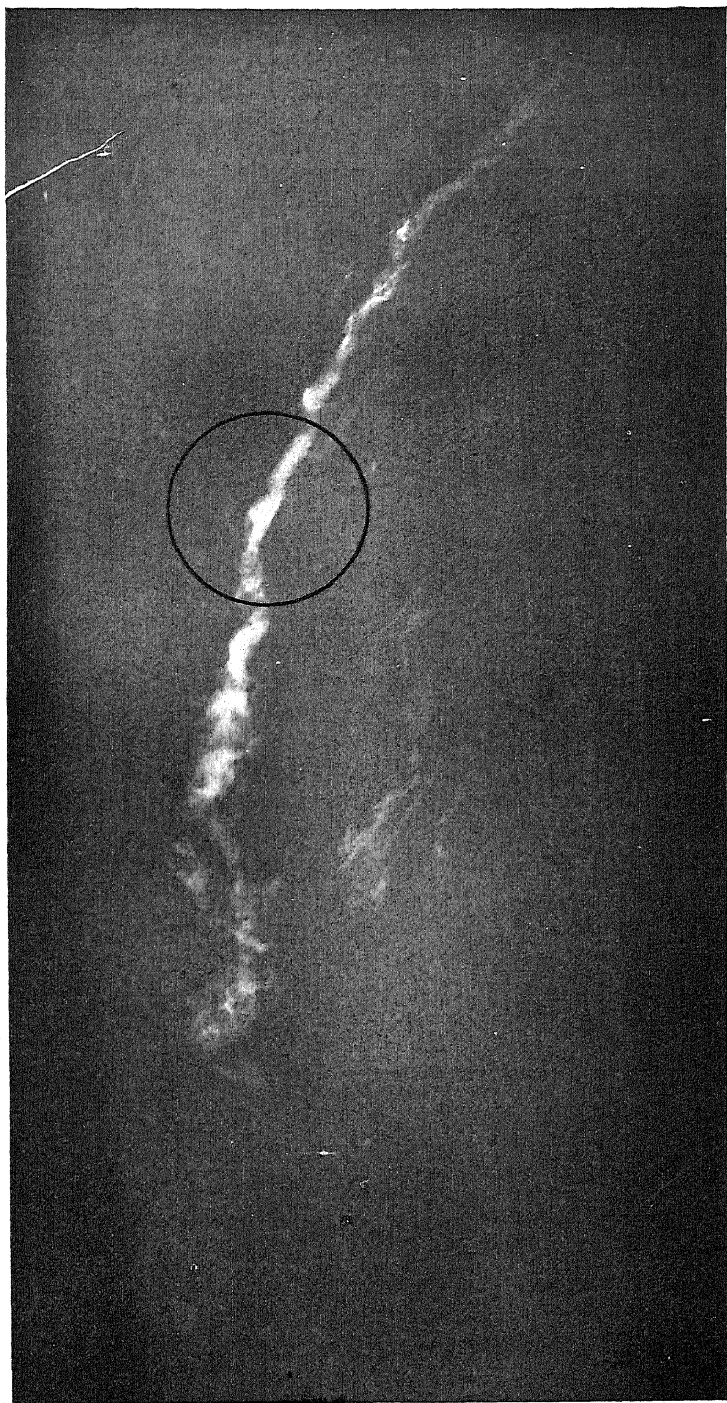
RADIOGRAPH OF STEEL CASTING, $\frac{3}{16}$ IN. THICK, SHOWING FLAW IN INTERIOR.
